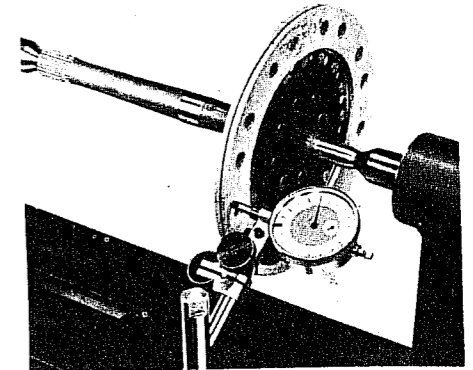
Checking the clutch disc run-out with a dial gauge.
